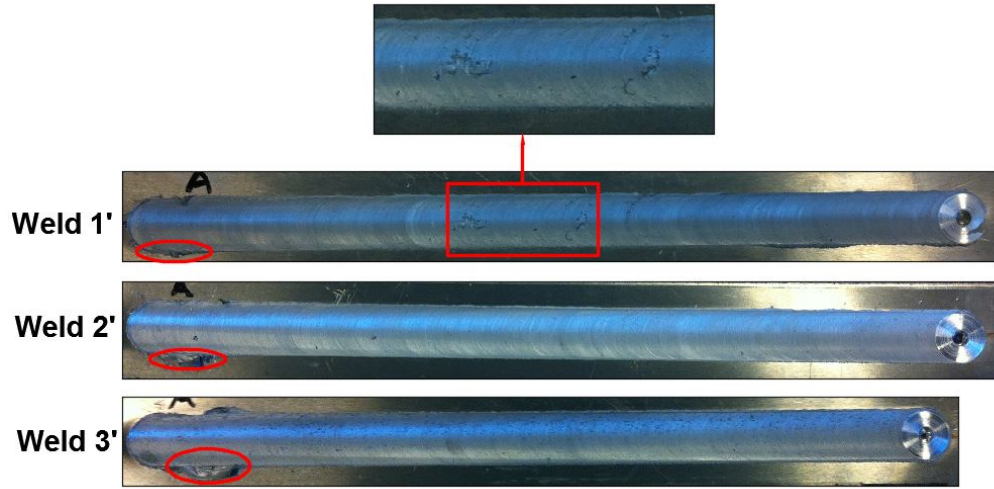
Visual inspection of innovative FSW lap joints with three different welding parameters.
